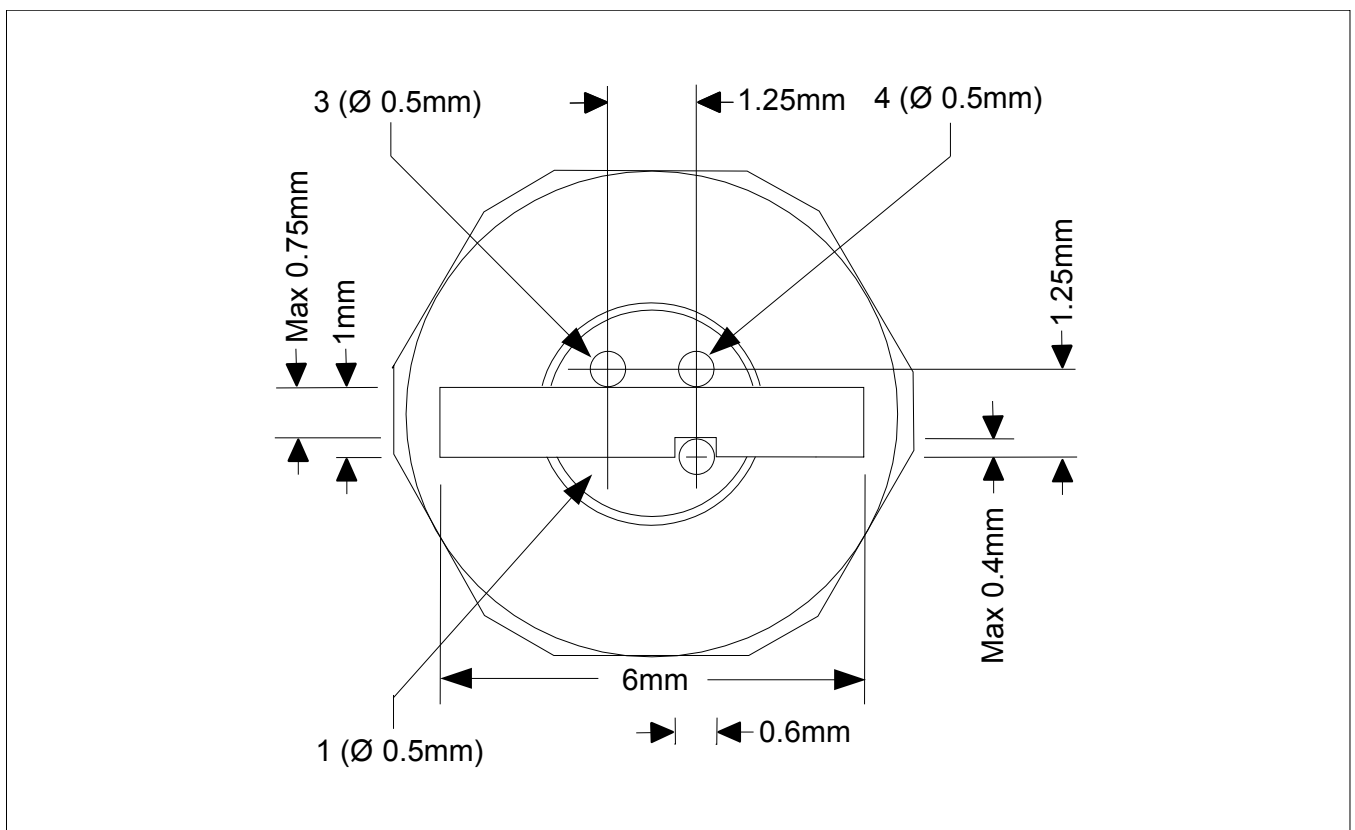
IEC-60947-5-2 Mounting to TM96.1 GENIE Explorer I VARIANT A
